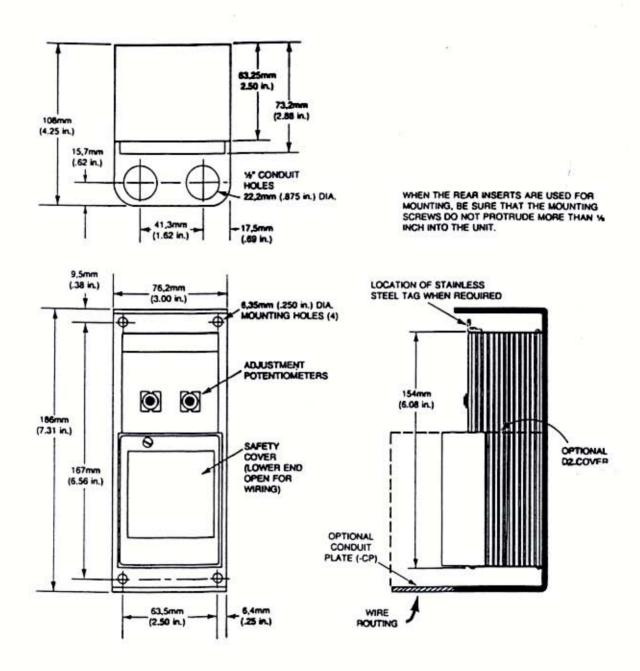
STD-Standard Housing with Conduit Plate (CP) Mounting
